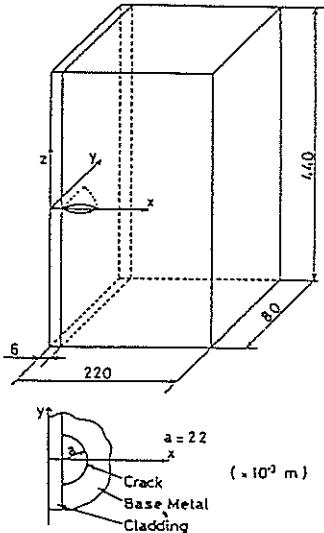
Three dimensional model of cladding and a crack.
